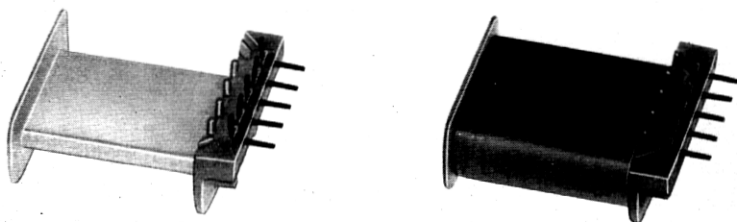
BF relay coil bobbin (left) and coil assembly (right).
